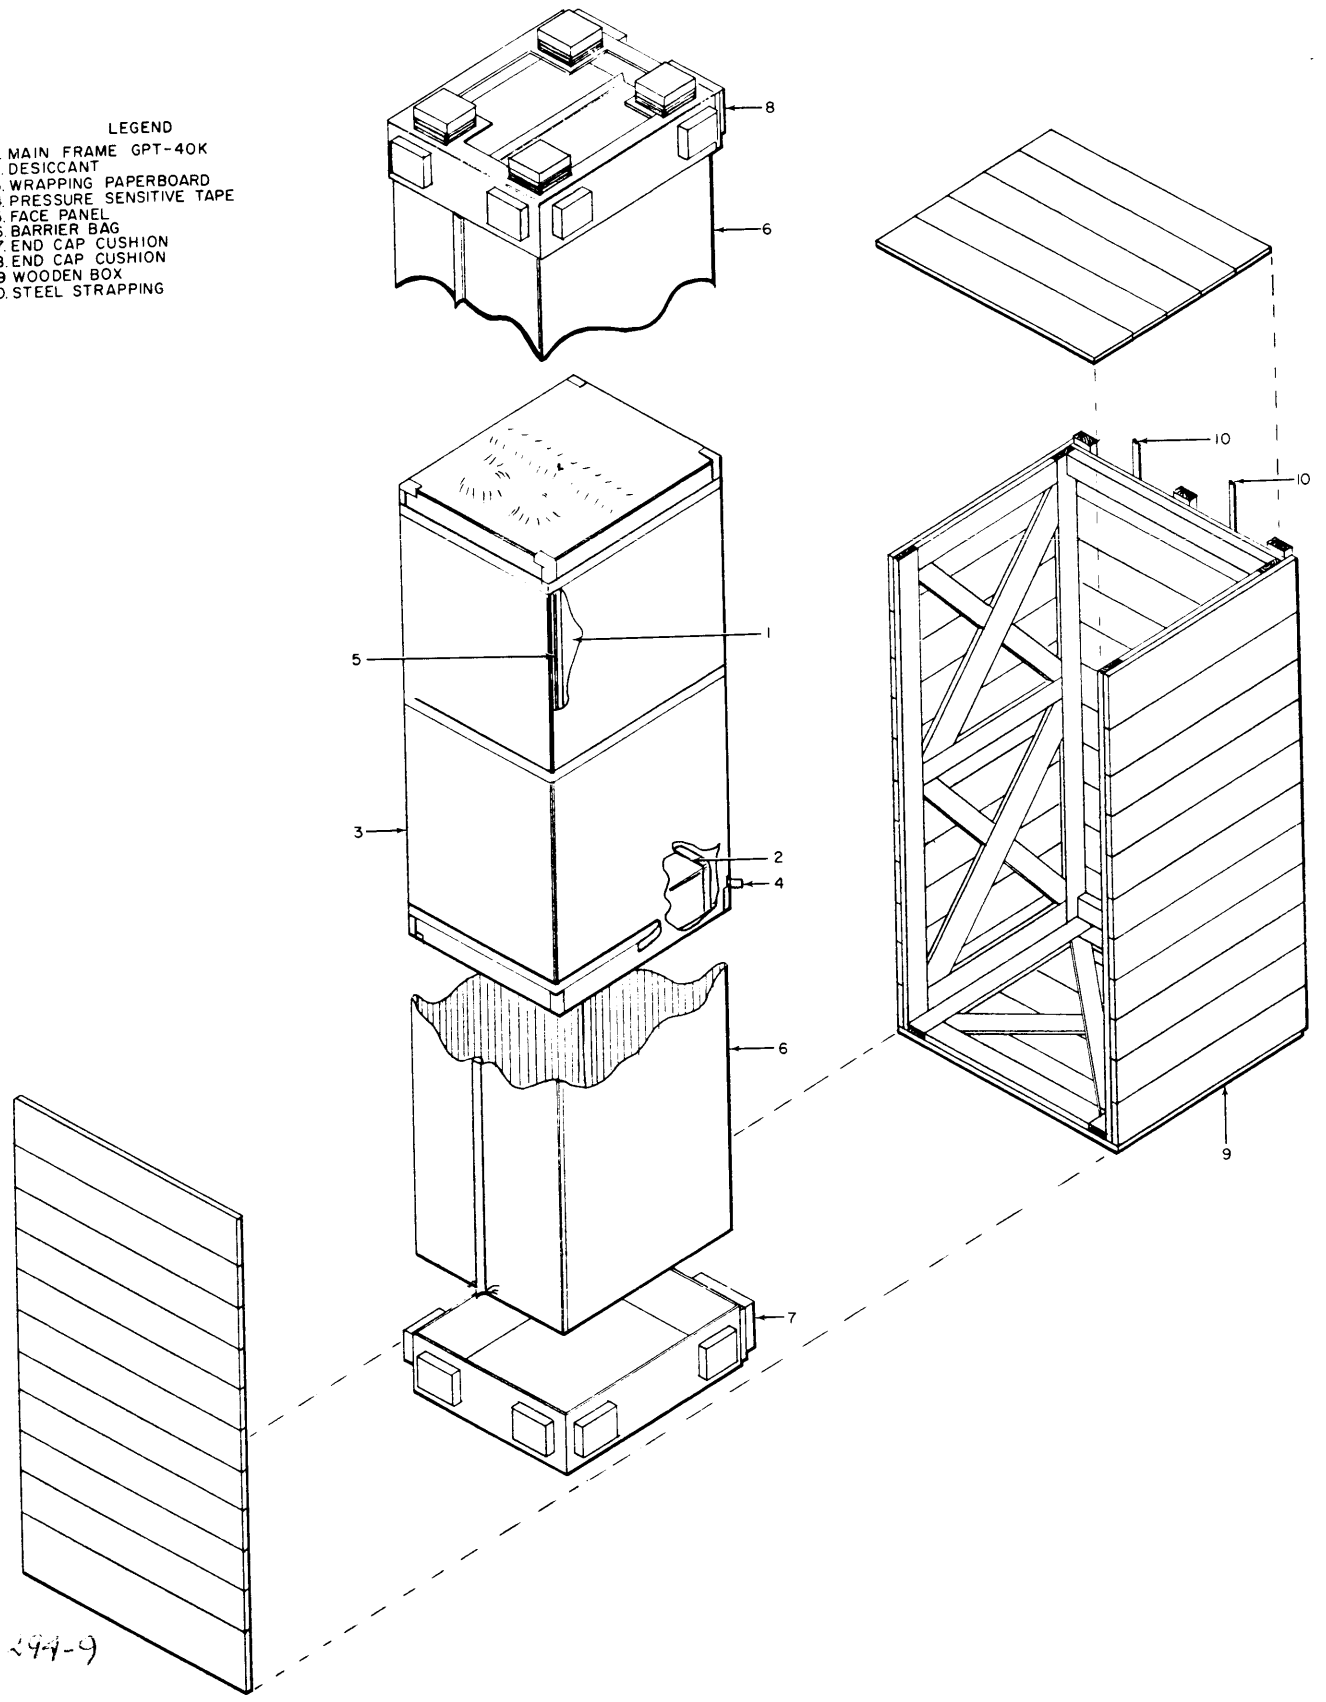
Typical Equipment Packaging (sheet 2 of 5)
